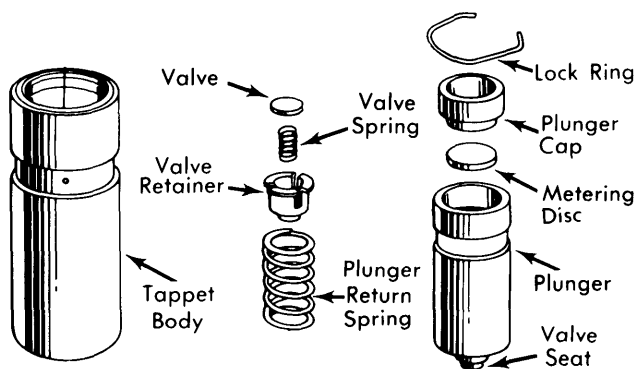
Exploded View of Hydraulic Valve Lifter Assembly
